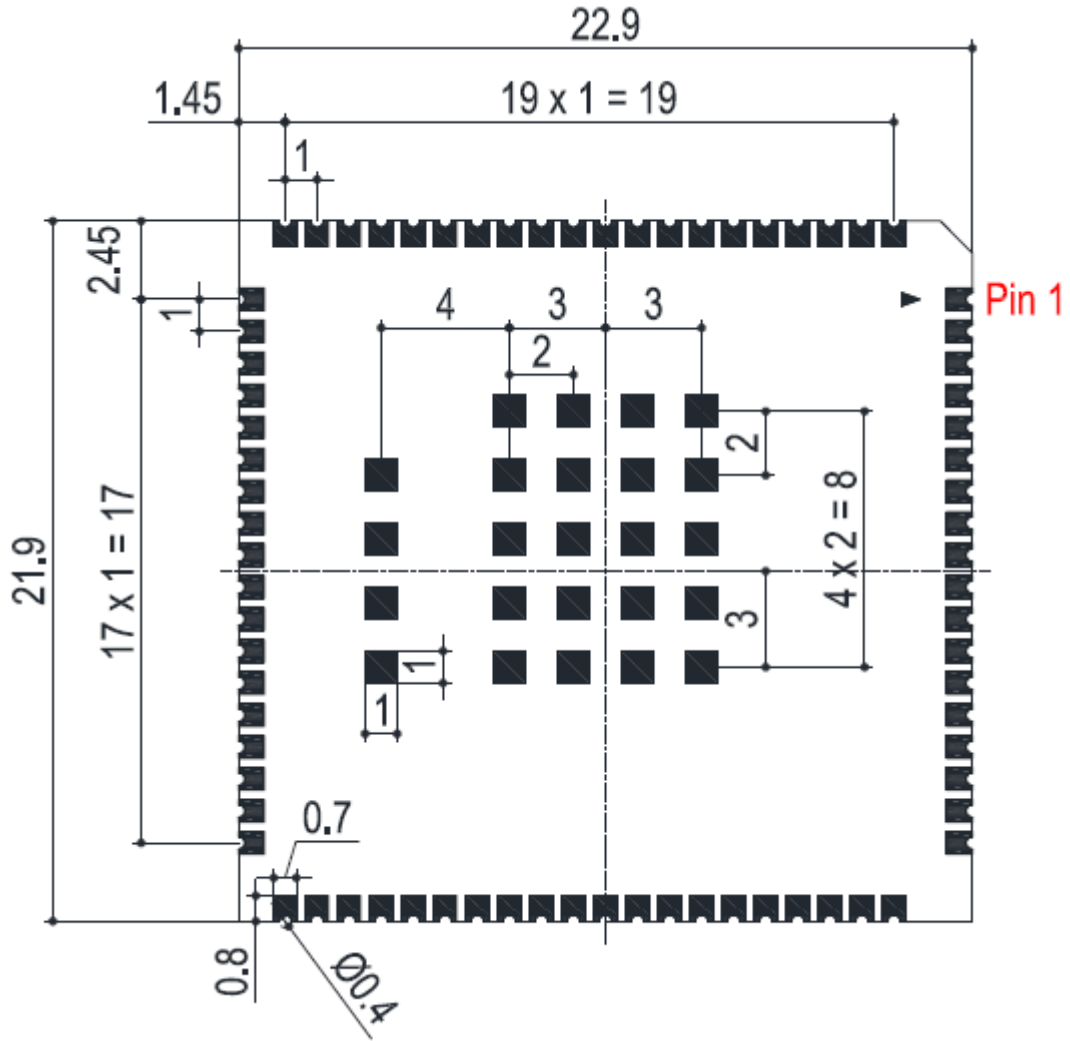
EC600M-CN Module Dimensions (Bottom View)
